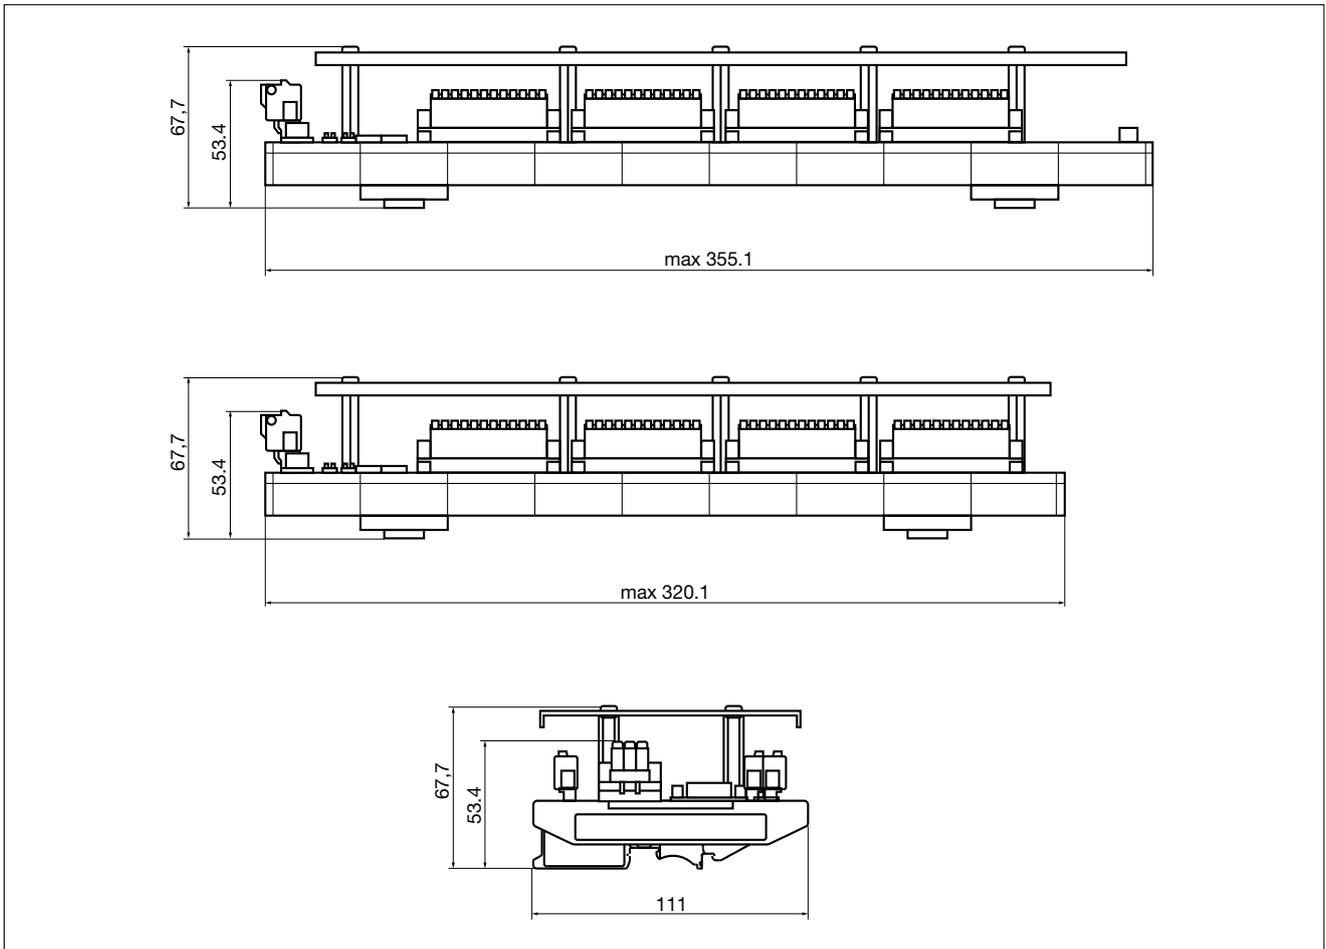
Dimensions CAN-IO, versions for assembly on DIN runner
